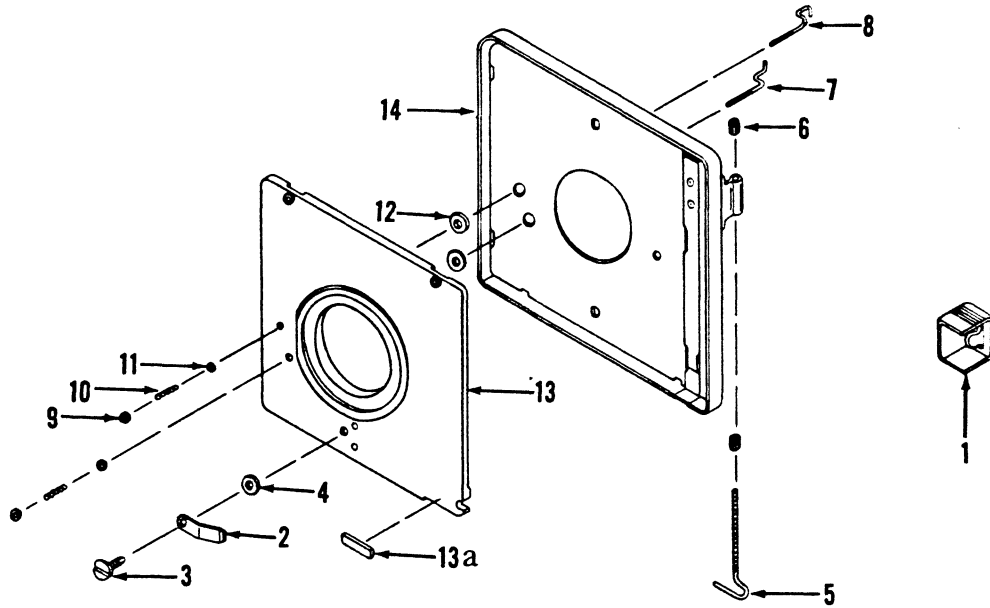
LENSBOARD COMPLETE FOR #2 GRAPHEX OR RAPAX SHUTTER
